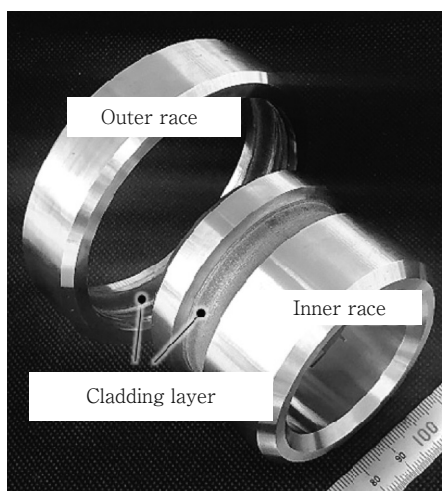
Exterior of ball bearings [出典：文献 1)]
